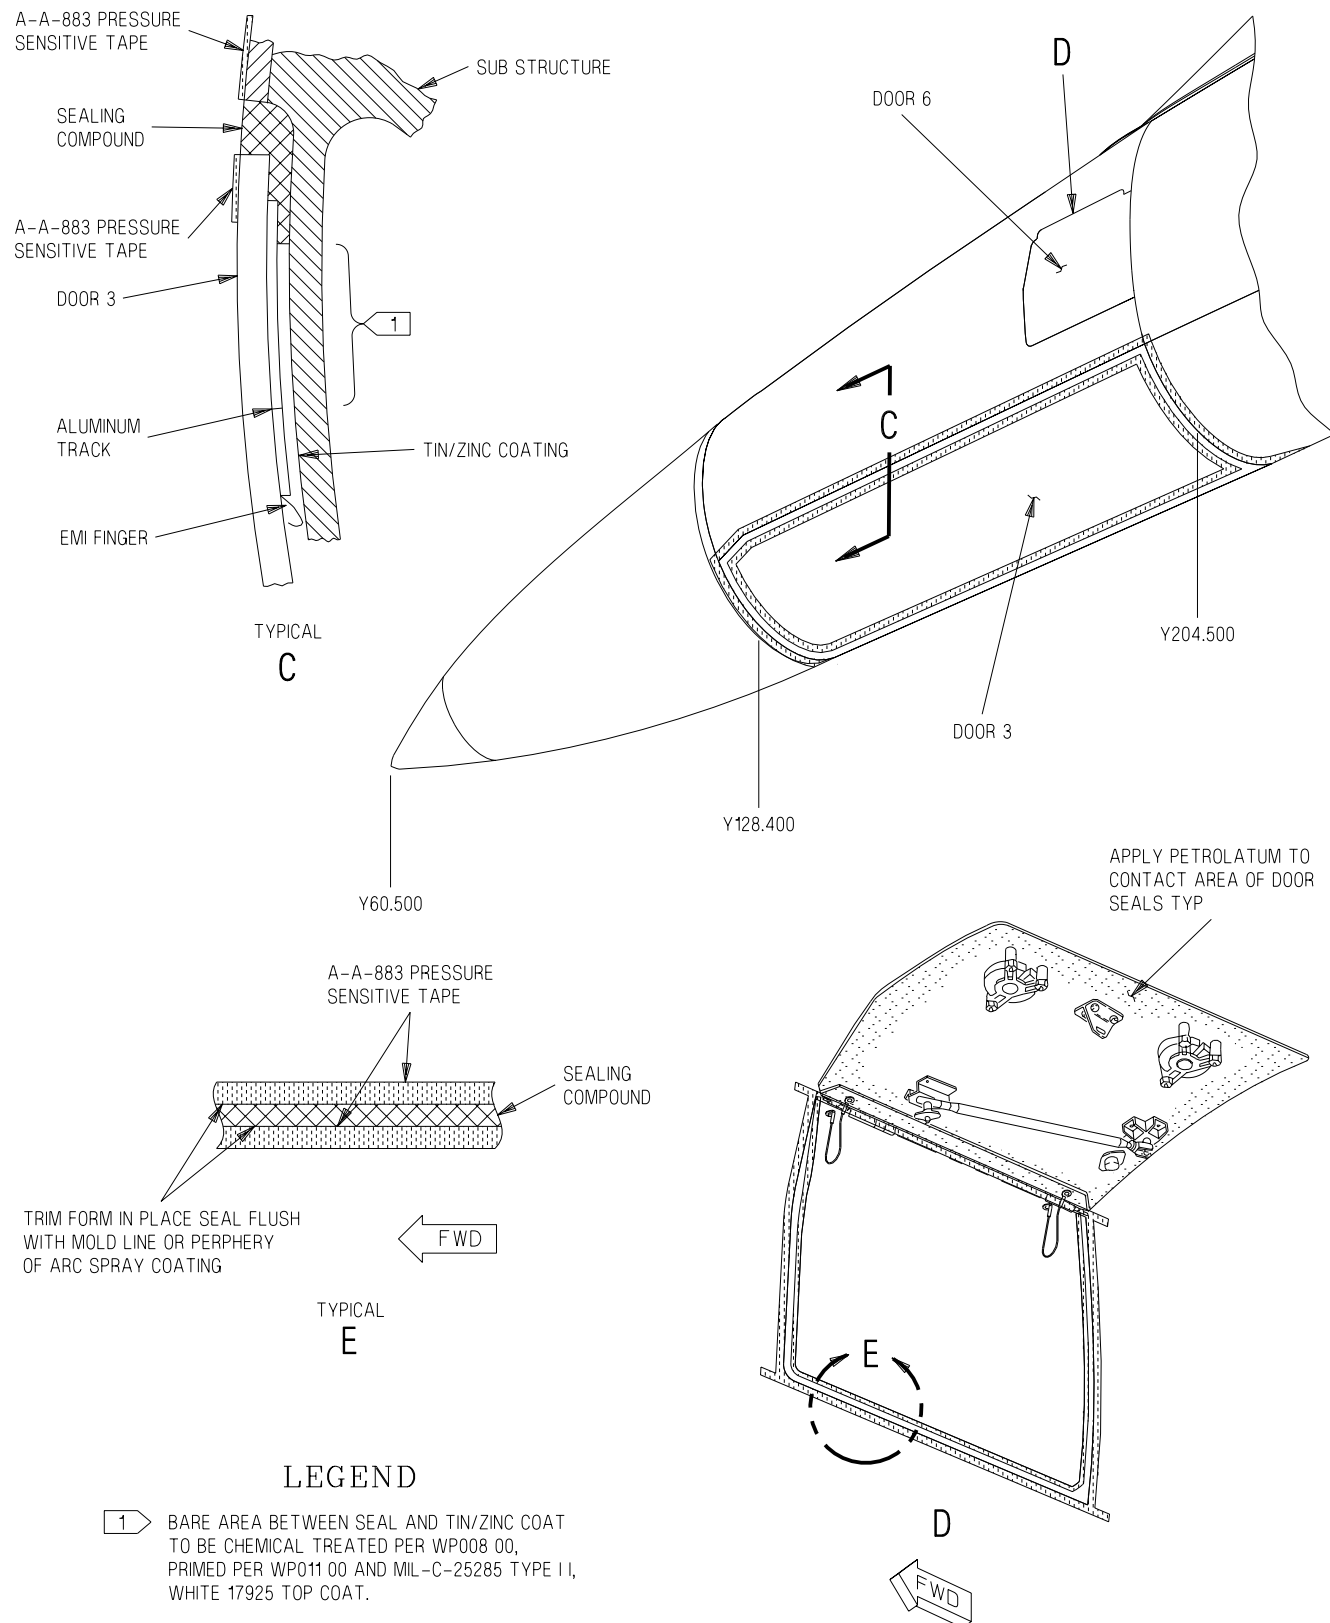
Application of Form in Place Seal Door Sills (Sheet 3)
